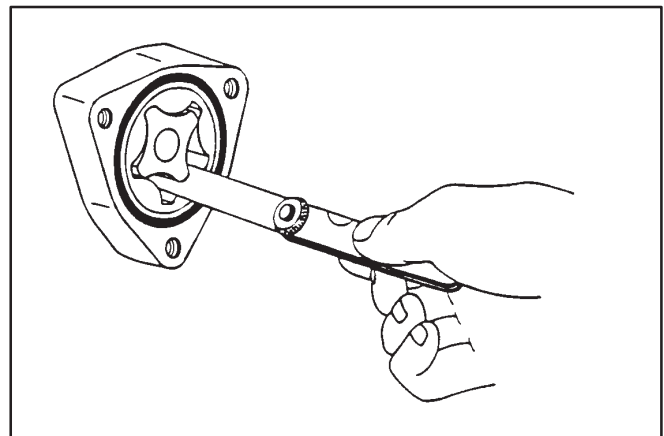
MEASURING PUMP ROTOR LOBE CLEARANCE
